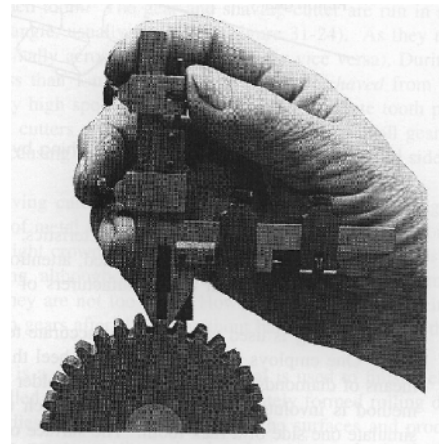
Using gear-tooth caliper to check the tooth thickness at the pitch circle
